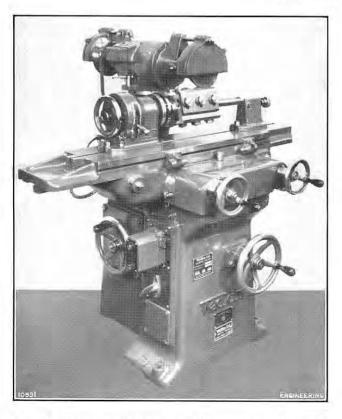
Universal Grinder for Woodworking Cutters; Wadkin, Ltd.
